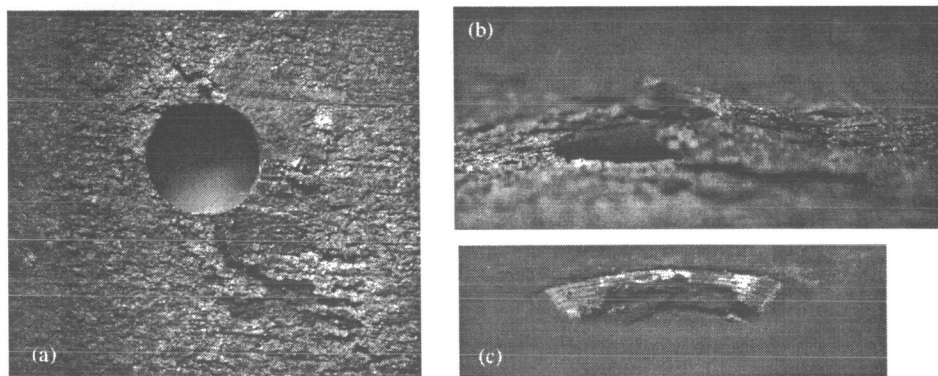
Optical image showing exfoliation around rivet hole in the B727-295 joint; a) Top view of exfoliated hole, b) Angled view showing exfoliation and c) View of countersink showing significant damage.
